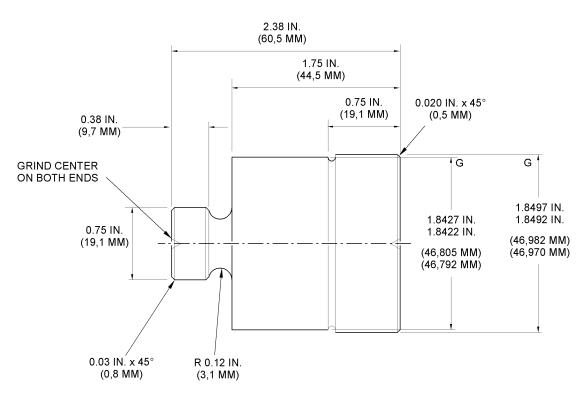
Speed Pickup Adjustment Plug (for use with spur gear P/N 23072-1220)
